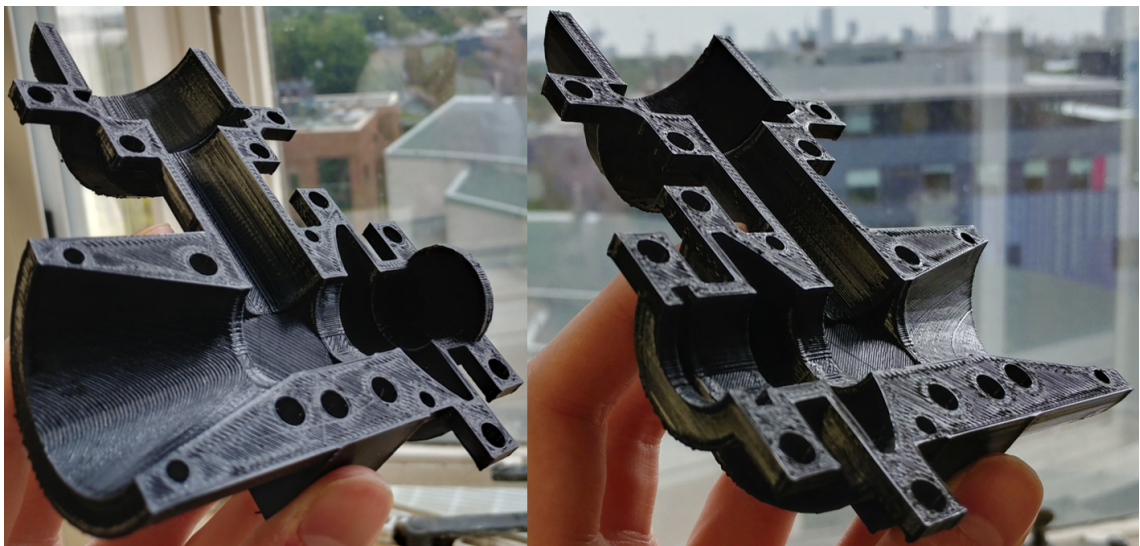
Image of the realised 3D printed opto-mechanical mount for the QMSPEC fibre coupling system.
